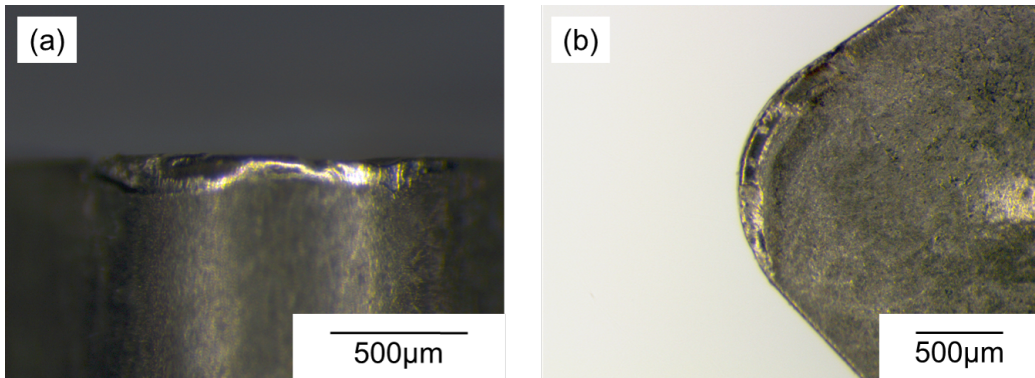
Microscope images showing the degree of tool wear after trial prep 5 on billet 4.1. Showing (a) the flank face and (b) the rake face.
